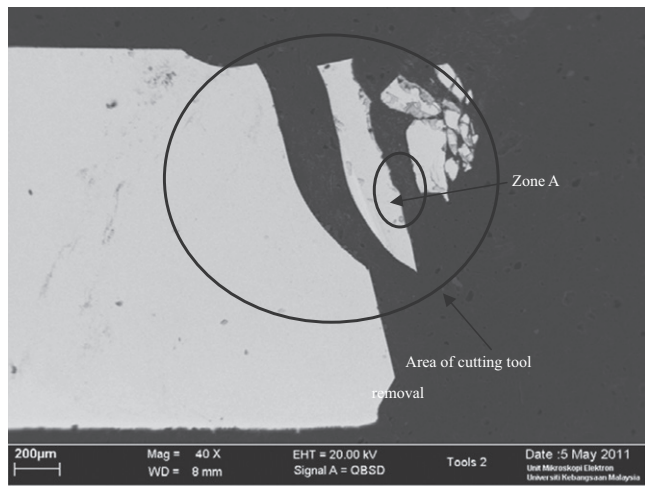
Failure mode of carbide cutting tool at cutting speed of 135 m/min, MQL 50 mL, feed rate 0.1 mm/tooth, and depth of cut 2 mm.
